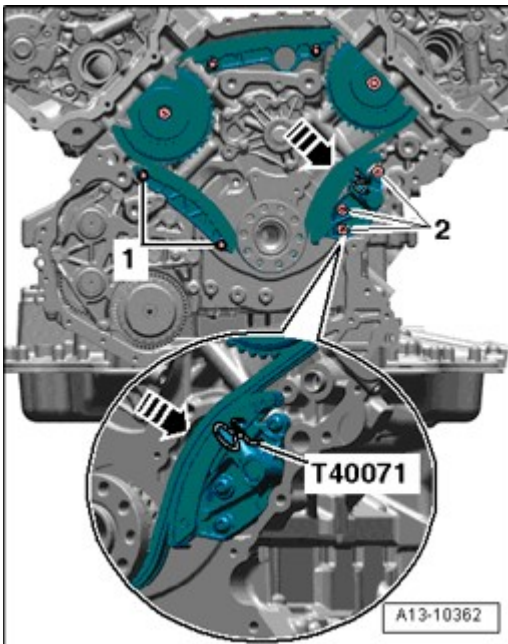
Pushing Drive Chain Tensioner Guide Rail And Securing Chain Tensioner Using Locking Pin T40071
